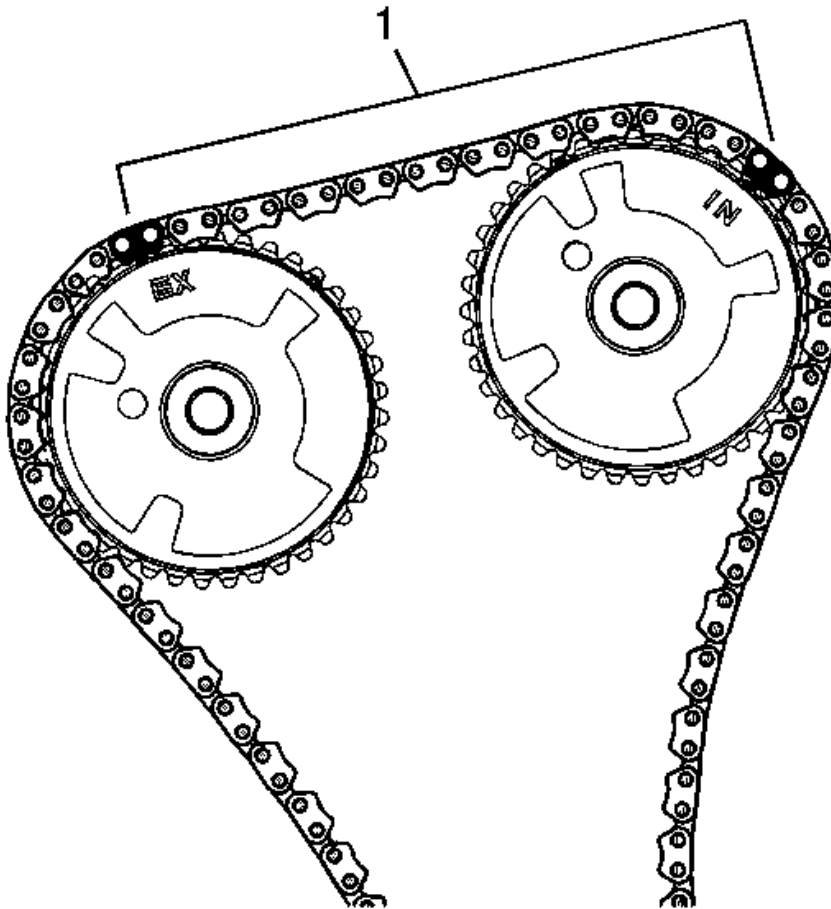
View Of Secondary Camshaft Drive Chain
